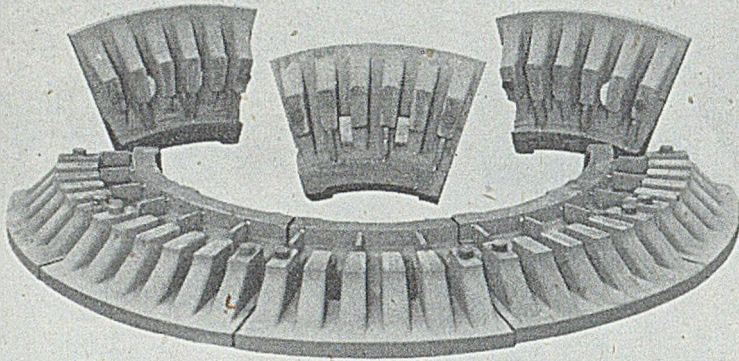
Stator Core End-plate Casting for an Alternator produced in a Moulding Box; it weighs about 6 tons.
